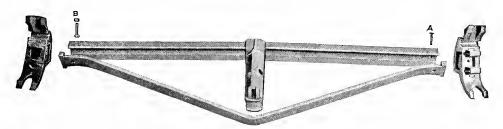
Huntoon Brake Beam with Heads Detached. Joliet Railway Supply Company.
